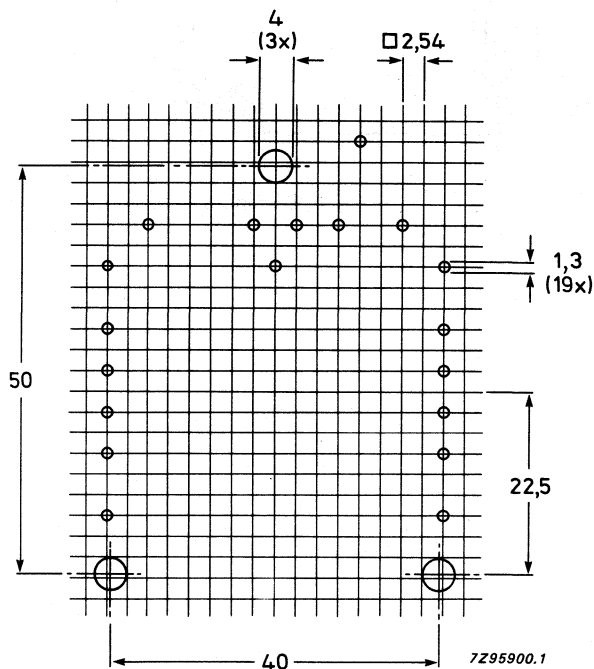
Hole pattern for mounting on a printed-wiring board (solder side).
